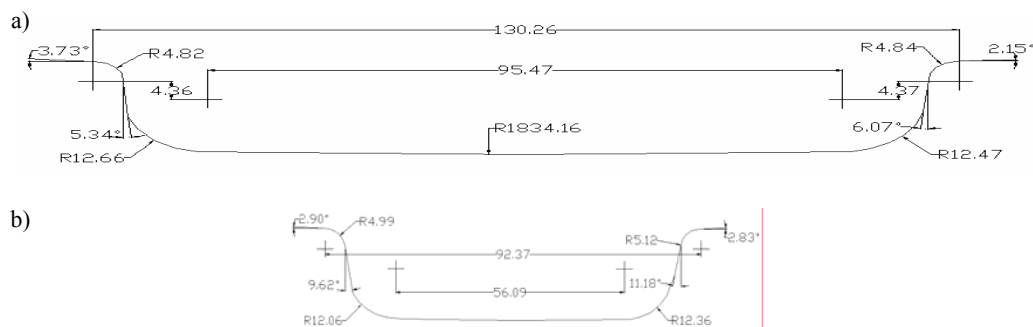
Spring-back parameters in the case of rectangular part made from TWB steel sheets:
